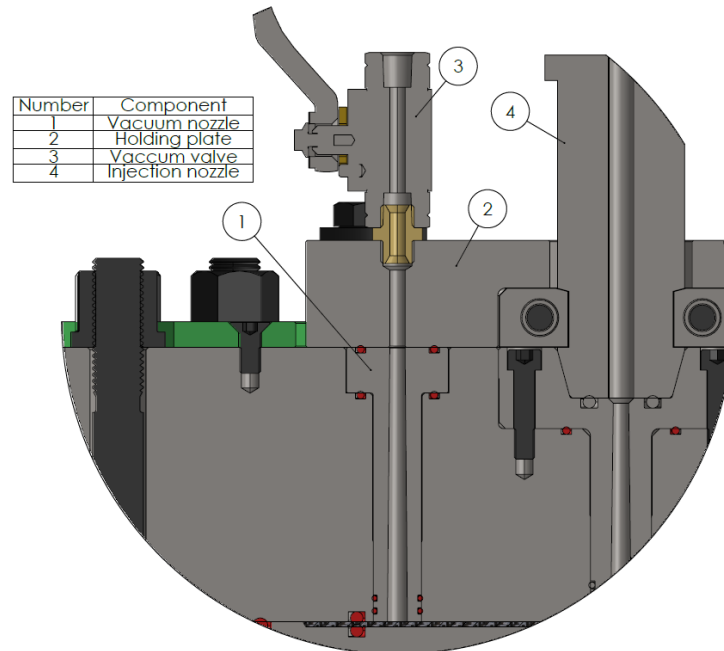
Detail of connection between vacuum nozzles and the closure valves
